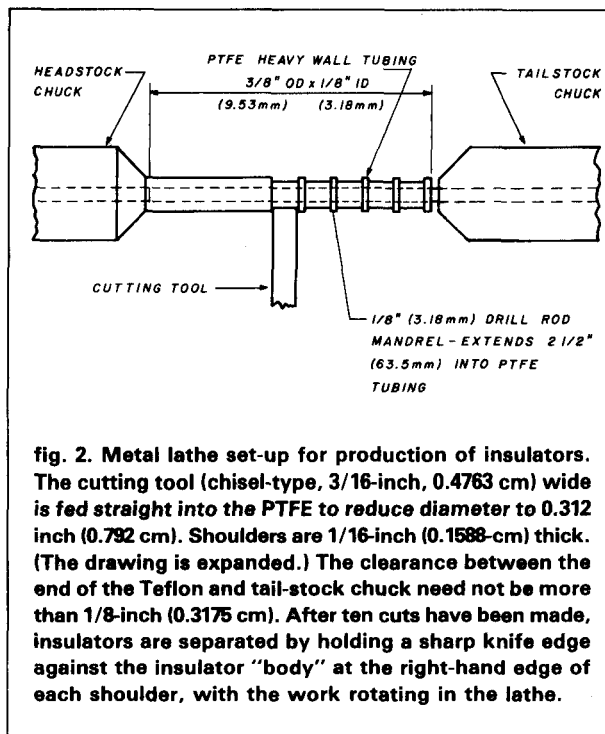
Metal lathe set-up for production of insulators. The cutting tool (chisel-type, 3/16-inch, 0.4763 cm) wide is fed straight into the PTFE to reduce diameter to 0.312 inch (0.792 cm). Shoulders are 1/16-inch (0.1588-cm) thick. (The drawing is expanded.) The clearance between the end of the Teflon and tail-stock chuck need not be more than 1/8-inch (0.3175 cm). After ten cuts have been made, insulators are separated by holding a sharp knife edge against the insulator "body" at the right-hand edge of each shoulder, with the work rotating in the lathe.
